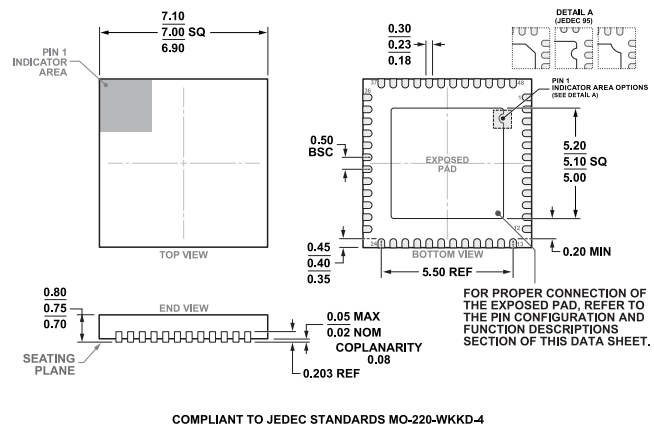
48-Lead Lead Frame Chip Scale Package [LFCSP]
